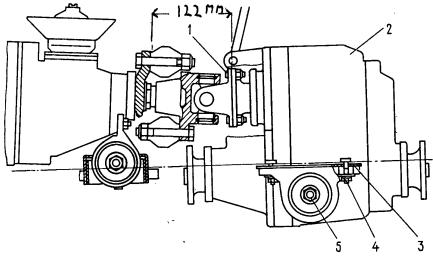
Transfer Case Installation Diagram: 1 - flange bolts of intermediate propeller shaft and transfer case drive shaft; 2 - transfer case;
